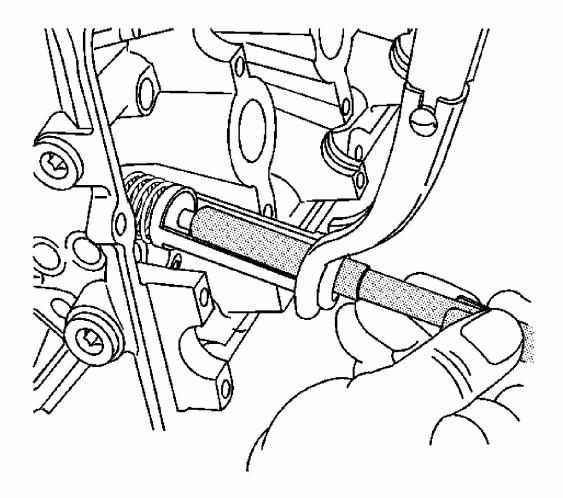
View Of J 43059 & Valve Keepers Courtesy of GENERAL MOTORS CORP.
